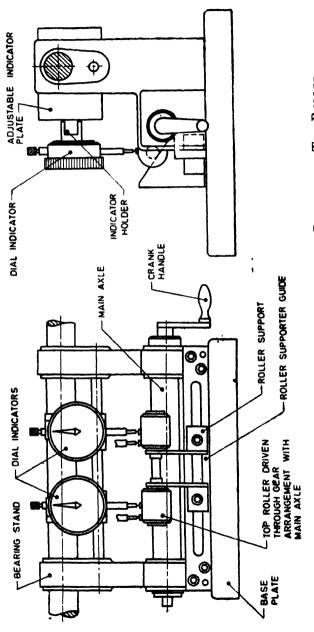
A TYPICAL ARRANGEMENT FOR MEASURING RUN-OUT OF TOP ROLLER
